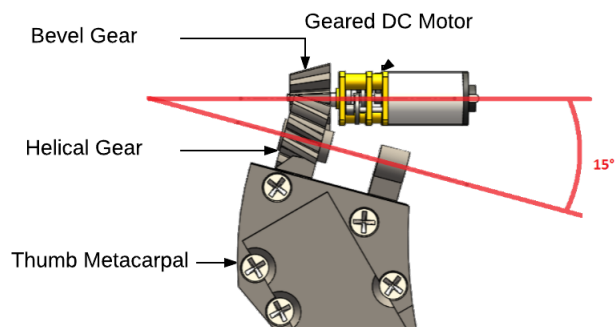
Thumb Mechanism side view, beveloid gear pair
